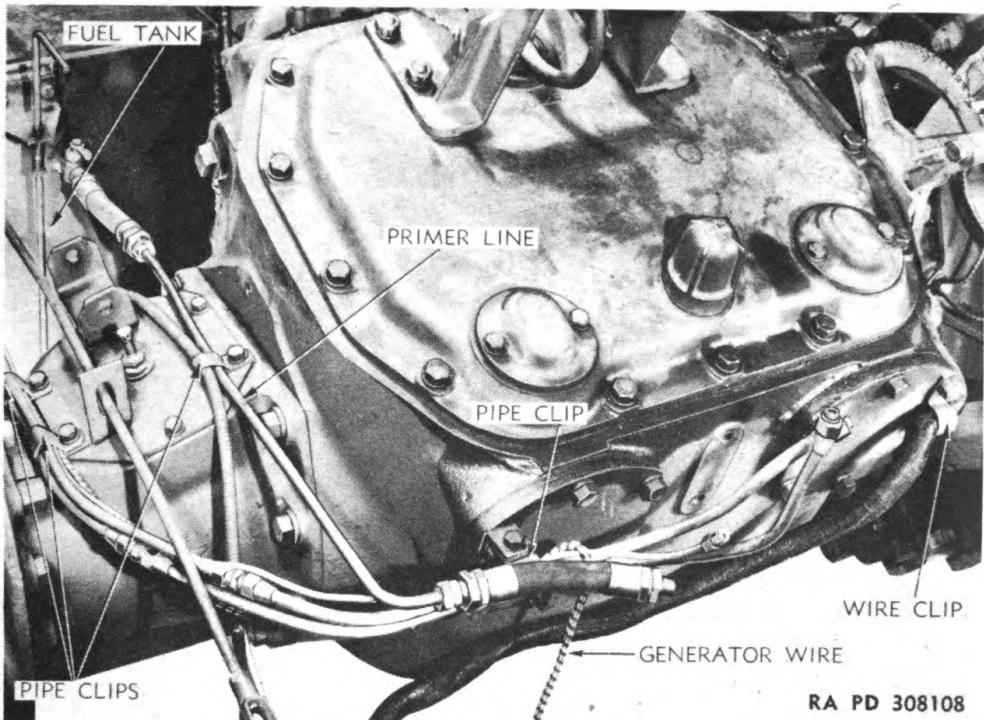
Location of Wires, Pipes, and Clips on Differential and Final Drive Cases
